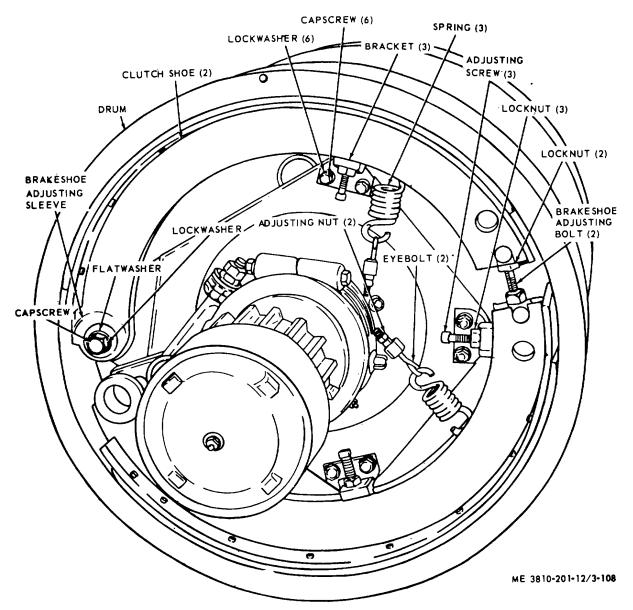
Jackshaft clutch shoes, removal and installation.
